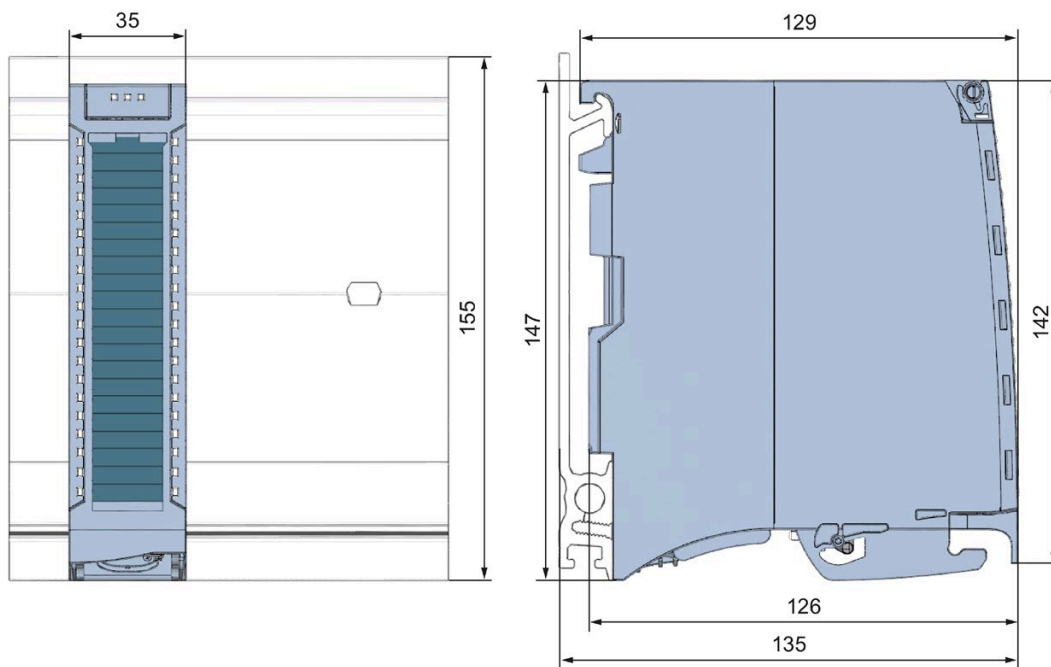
Dimension drawing of the DQ 16x230VAC/2A ST module
